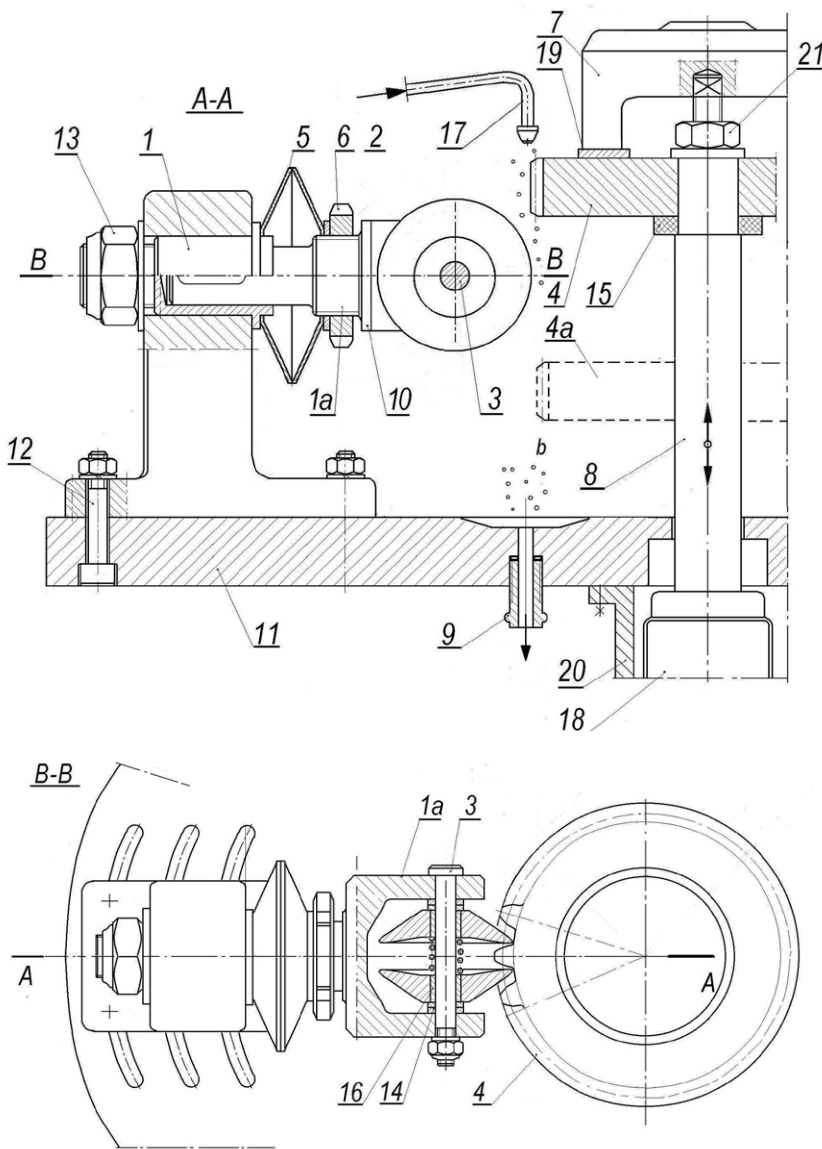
Device for pressure burnishing of the bottom of gear grooves
